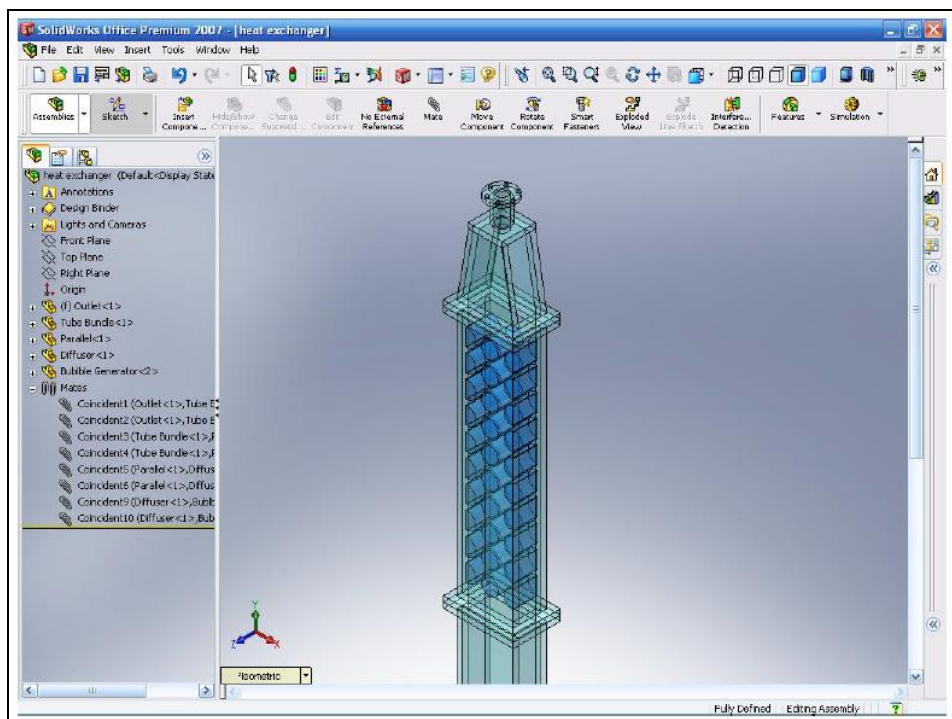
Assembly drawing of test section 38 mm in diameter in-line tube bundle, tube bundle and convergent section
